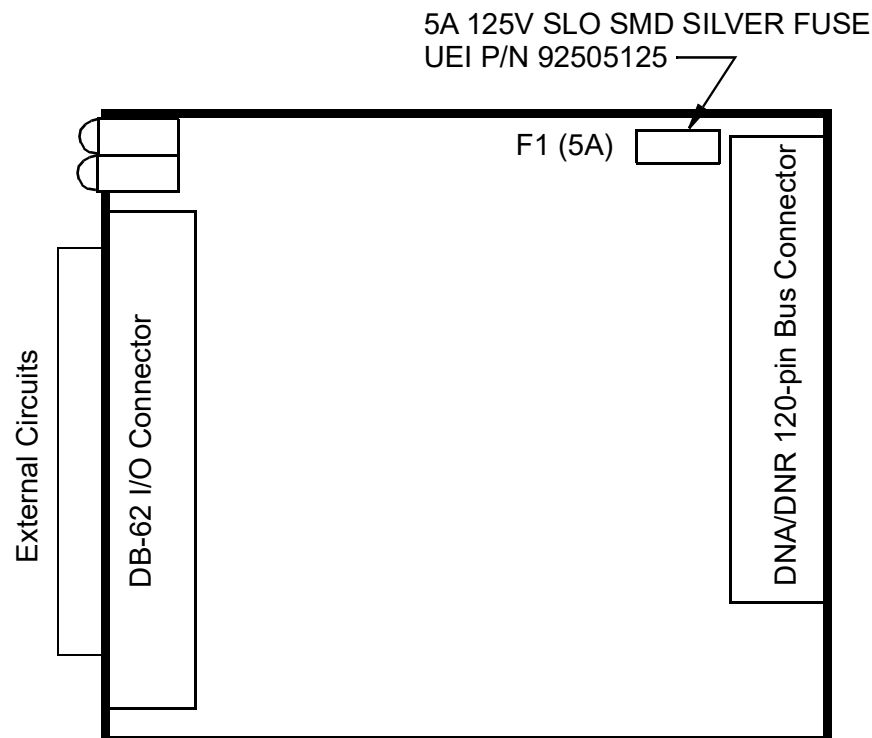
Location of Fuse for I/O Boards Equipped with a Fuse
